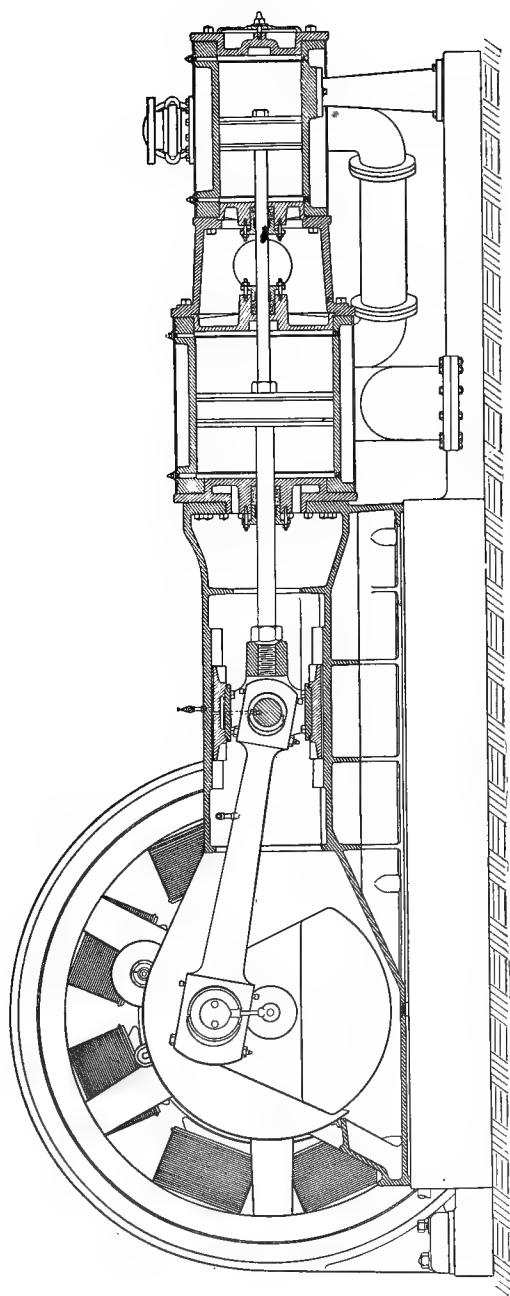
Vertical section of the high-speed tandem compound engine, manufactured by the
